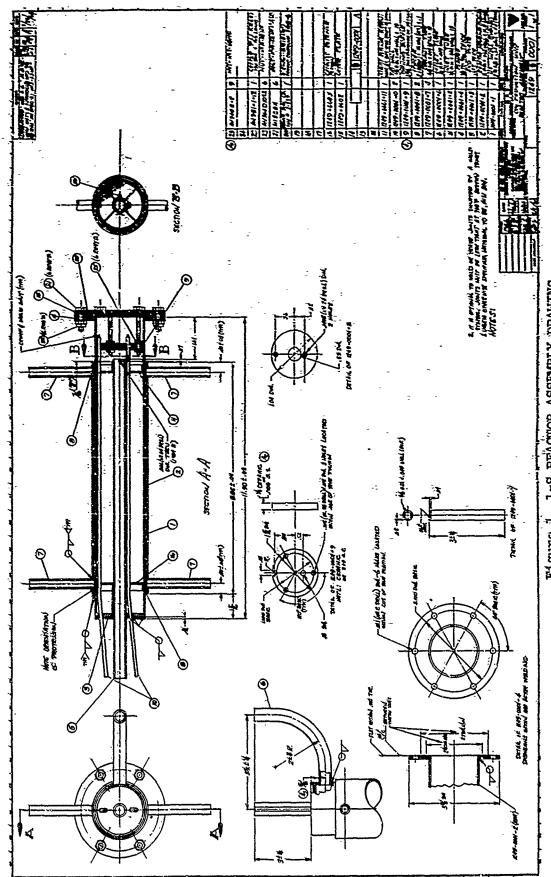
1-8 REACTOR ABSEMBLY DRAWING
